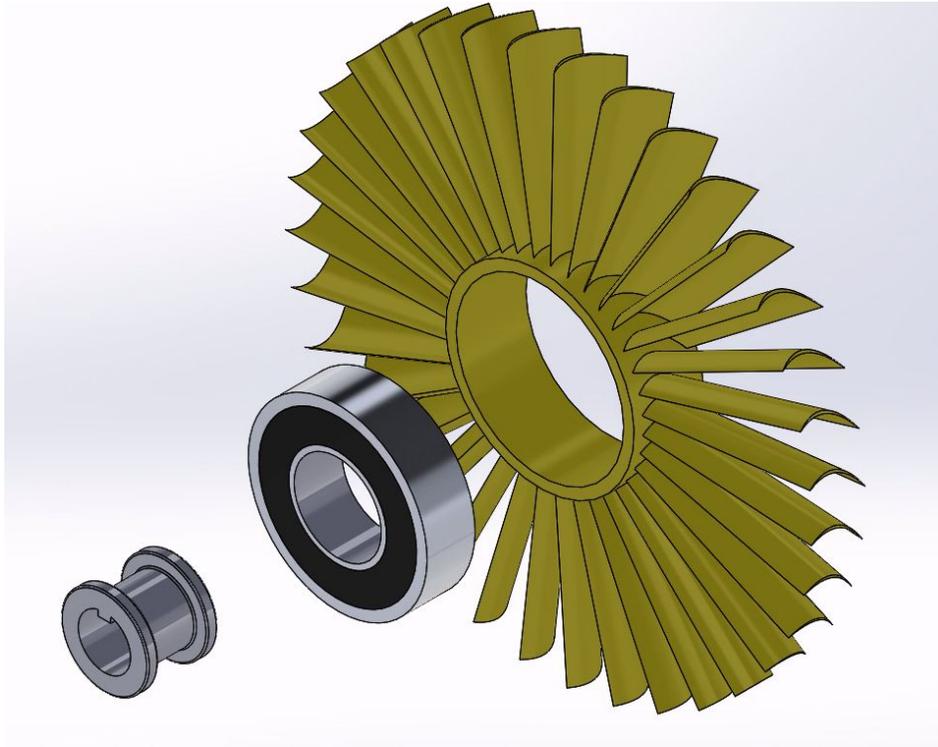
Ball Bearing casing with radial ball bearing and stator staging
